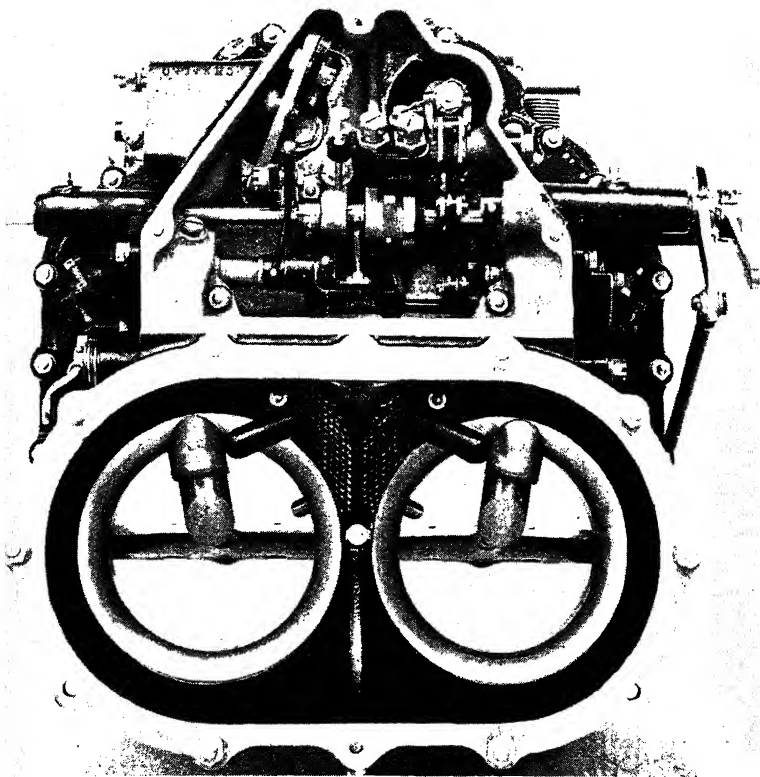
PLAN VIEW OF CARBURETTOR SHOWING LINKAGE CHAMBER
